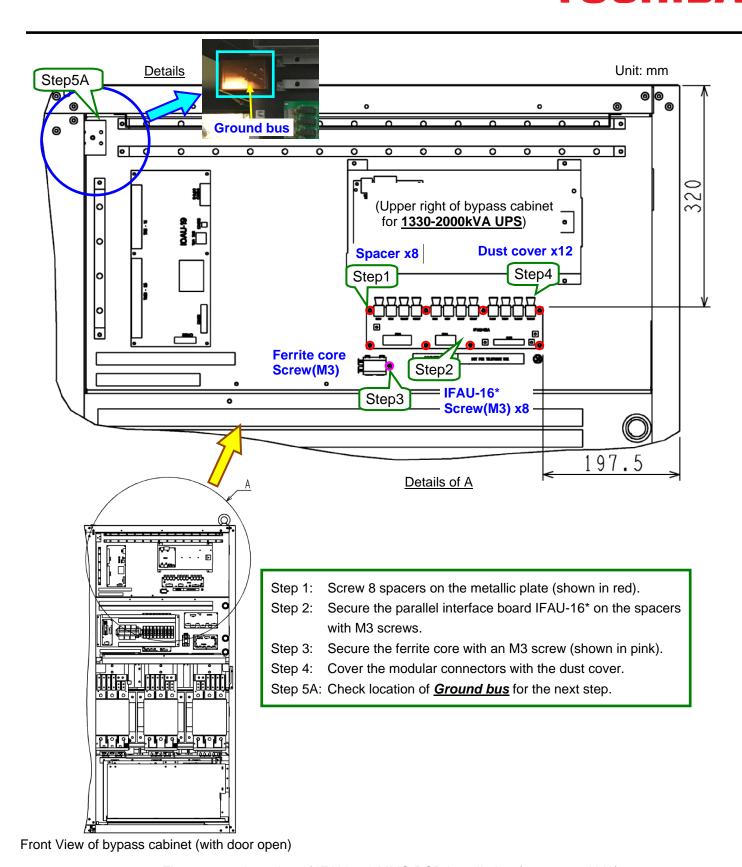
Location of IFAU-16* MMS PCB Installation (1330-2000kVA)
